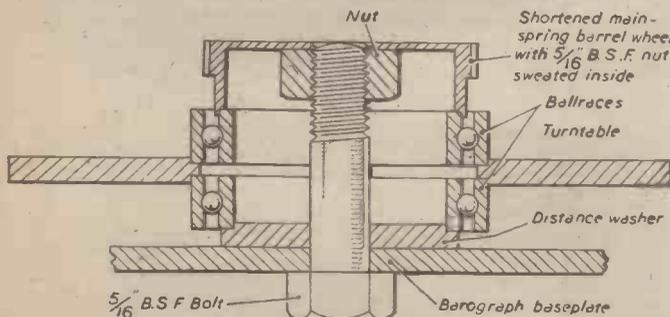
General sectional view of the drum turntable assembly showing how the turntable is lightly clamped between two light ball-races.
